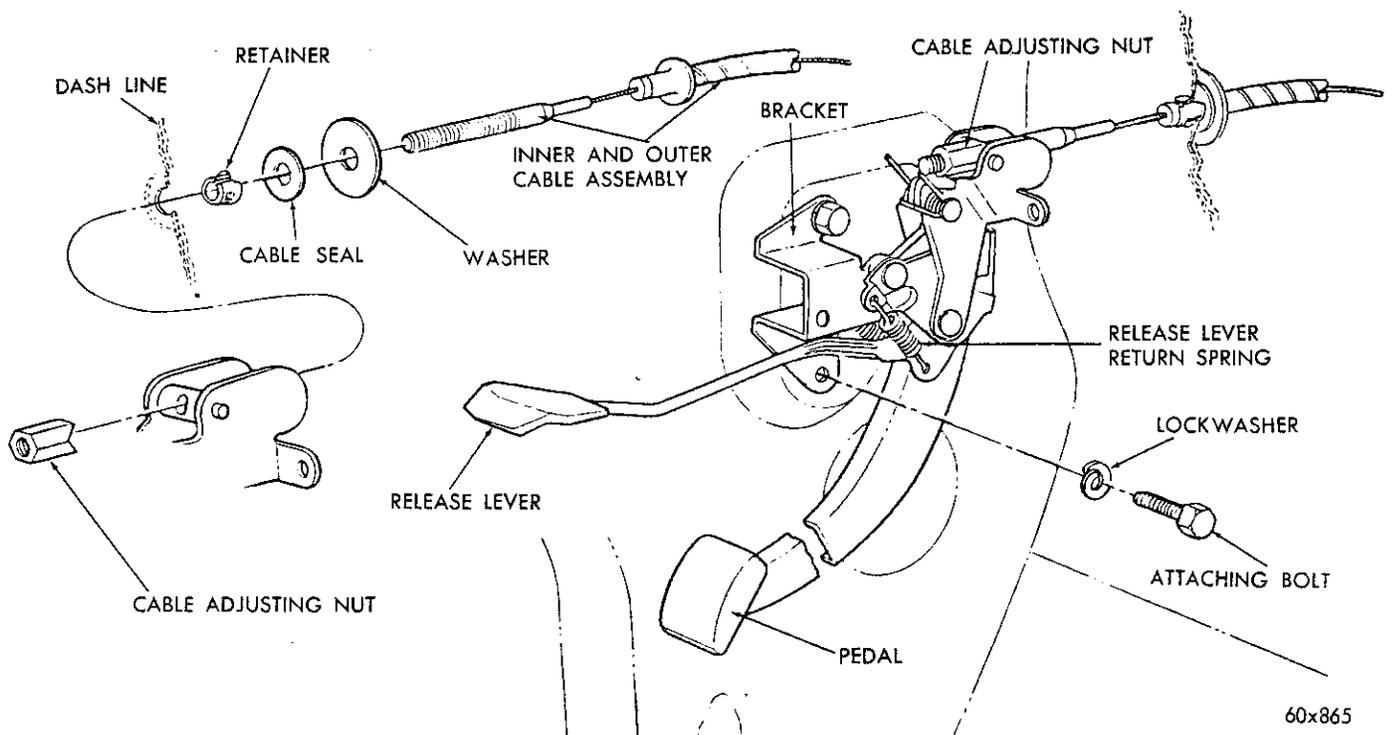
Parking Brake and Cable Assembly (Exploded View)
